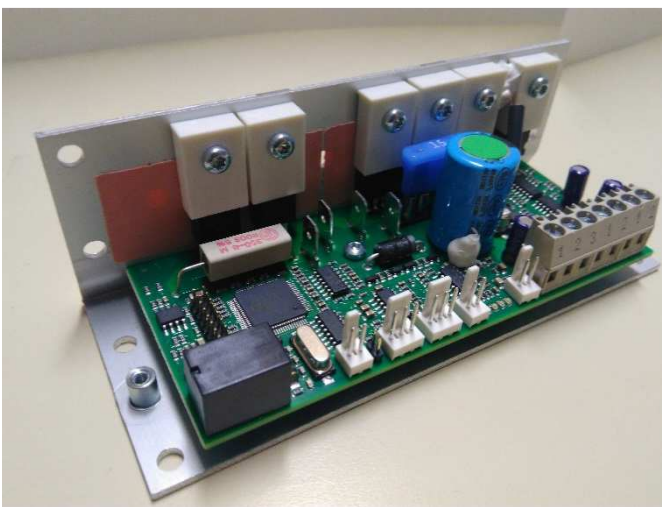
TC-XX-PR-59 programmable controller of the Peltier assembly
